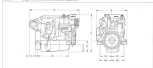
Engine with standard economy equipment, including coupler and gearbox (large mounted)
